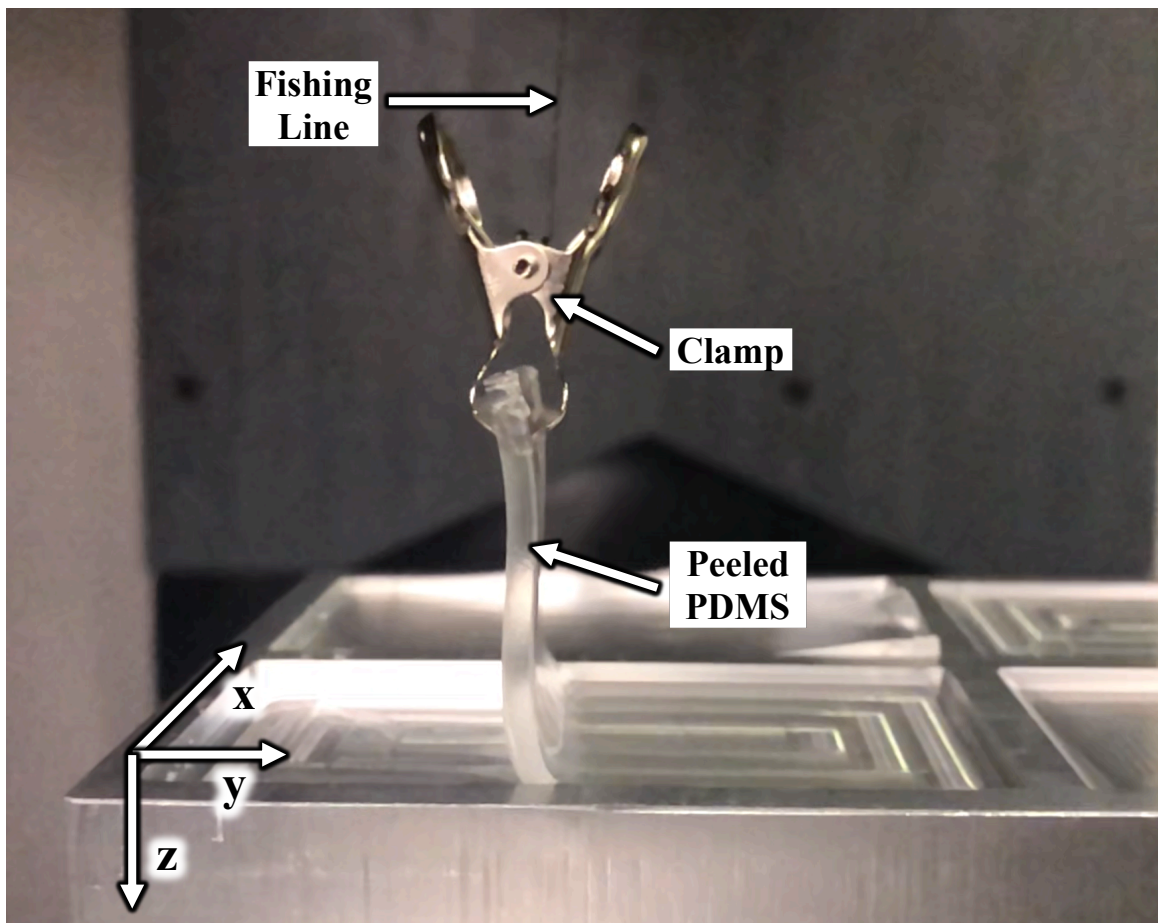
PDMS being peeled with a clamp on the Okuma milling machine
